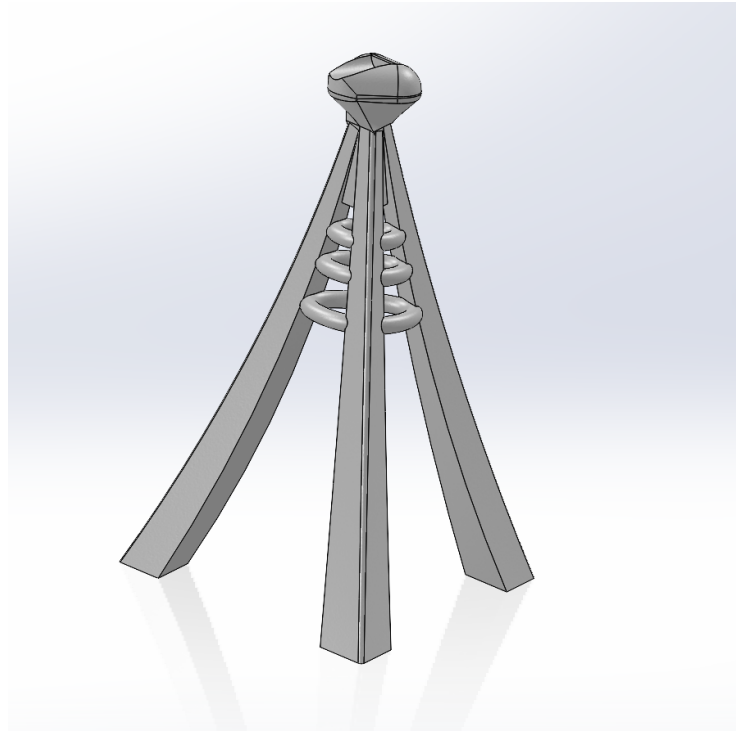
CAD Drawing showing the final generalized design for our Turbine Tower
